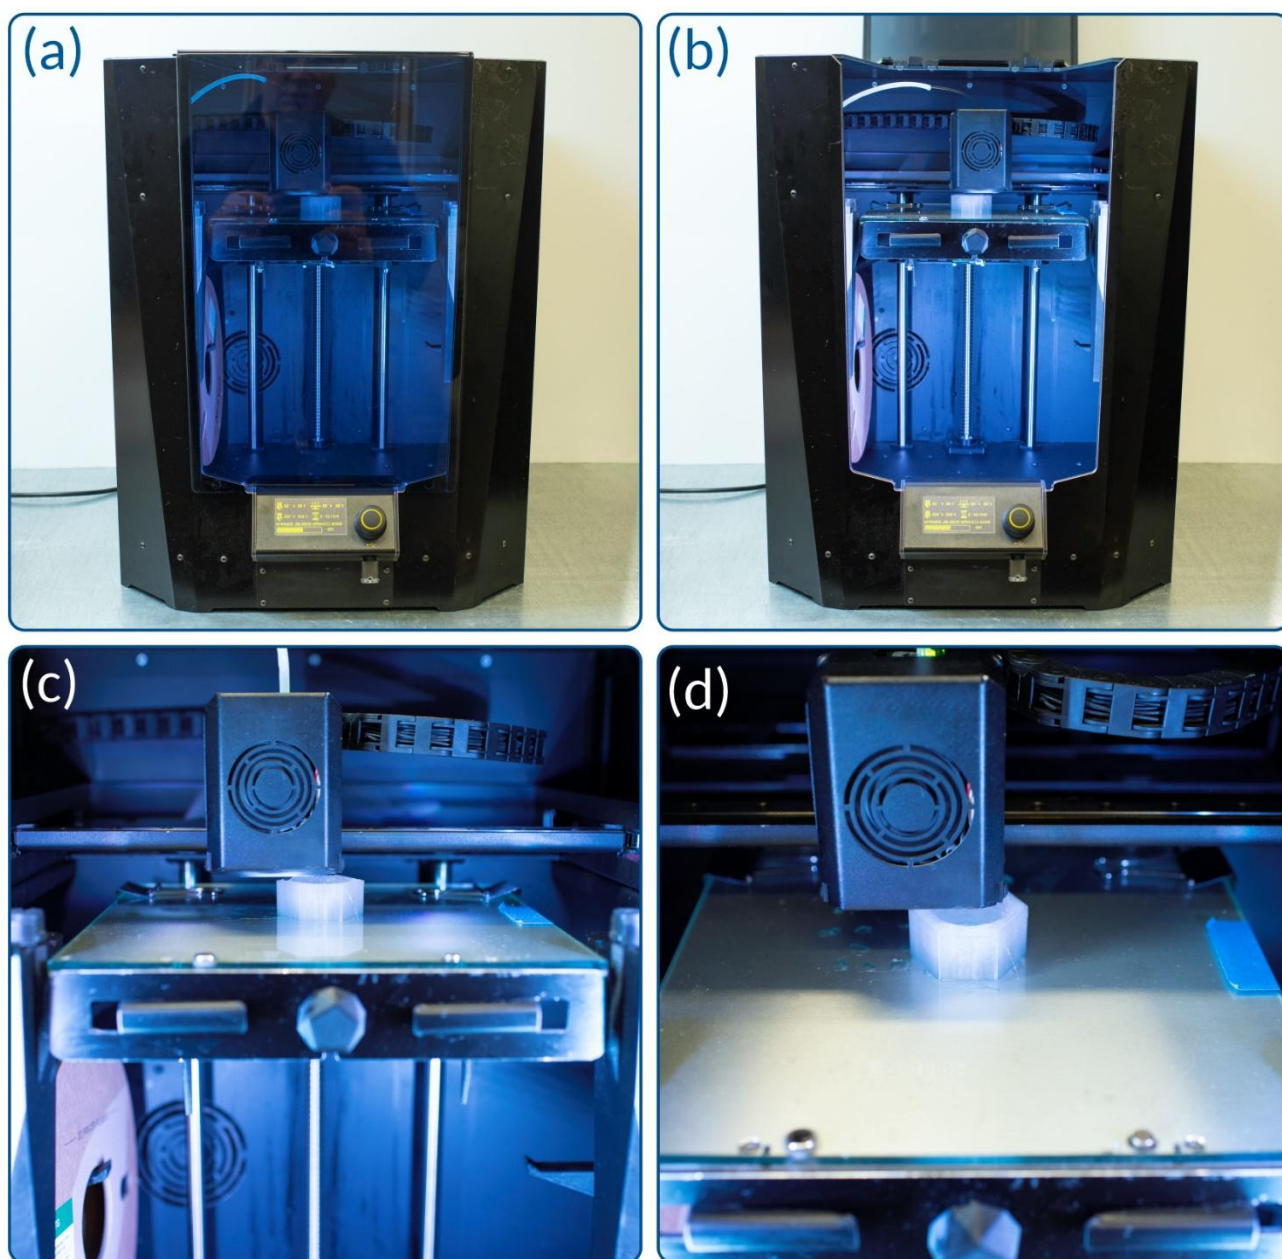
Manufacturing of the reactor cap with a rupture disc by PETG using the Picaso Designer X-Pro printer: (a) printer with a closed chamber; (b) printer with an open chamber; (c) printer bed with a printed cap, side view; (d) printer bed with a printed cap, top view.
